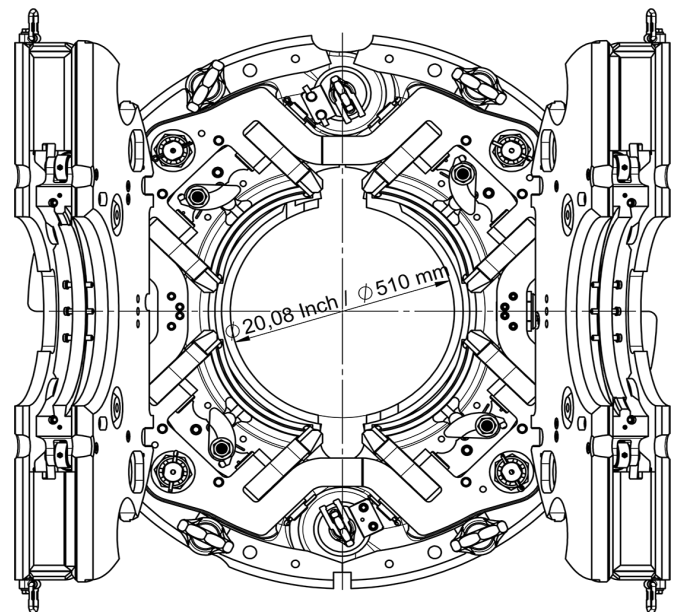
Inner Diameter with Bottom Guide System (optional)
